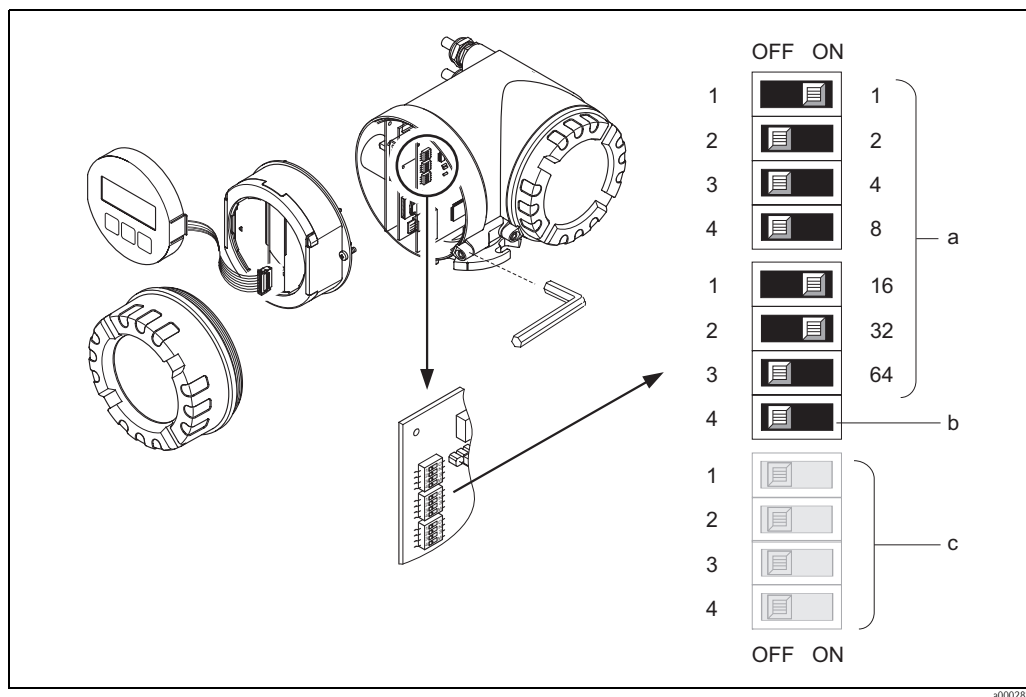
Addressing with the aid of miniature switches on the I/O board
